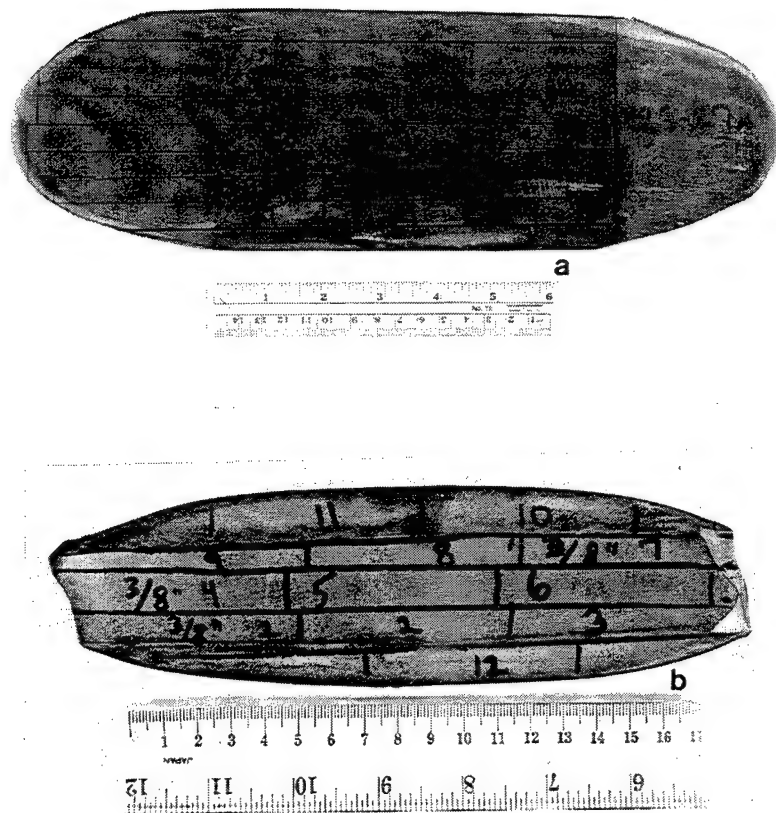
Specimen mapping for the (a) Ti-23Al-27Nb and (b) Ti-25Al-25Nb sheets. Sections were cut along the bold lines and the numbered regions represent the blanks from which specimens were machined.
